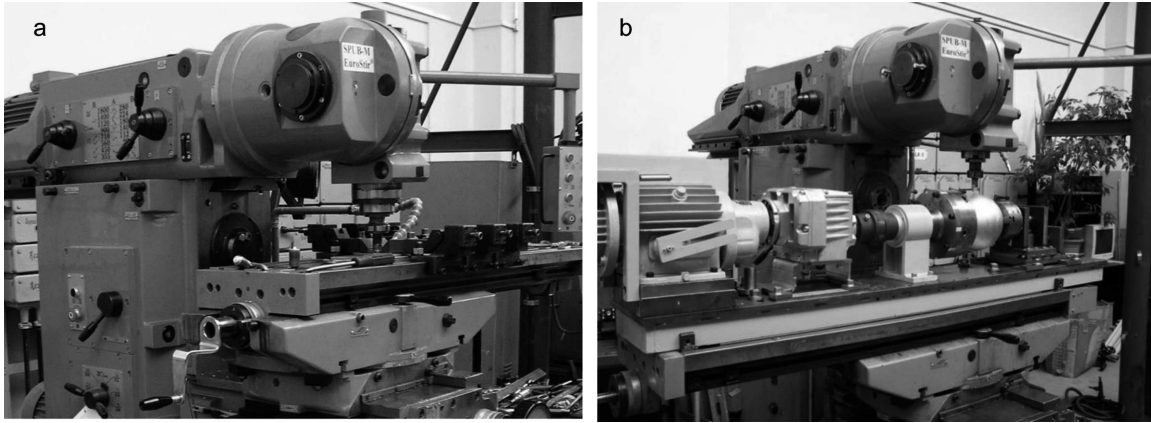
Station for FSW welding process, a) tooling for plate welding, b) tooling for valve balls welding
